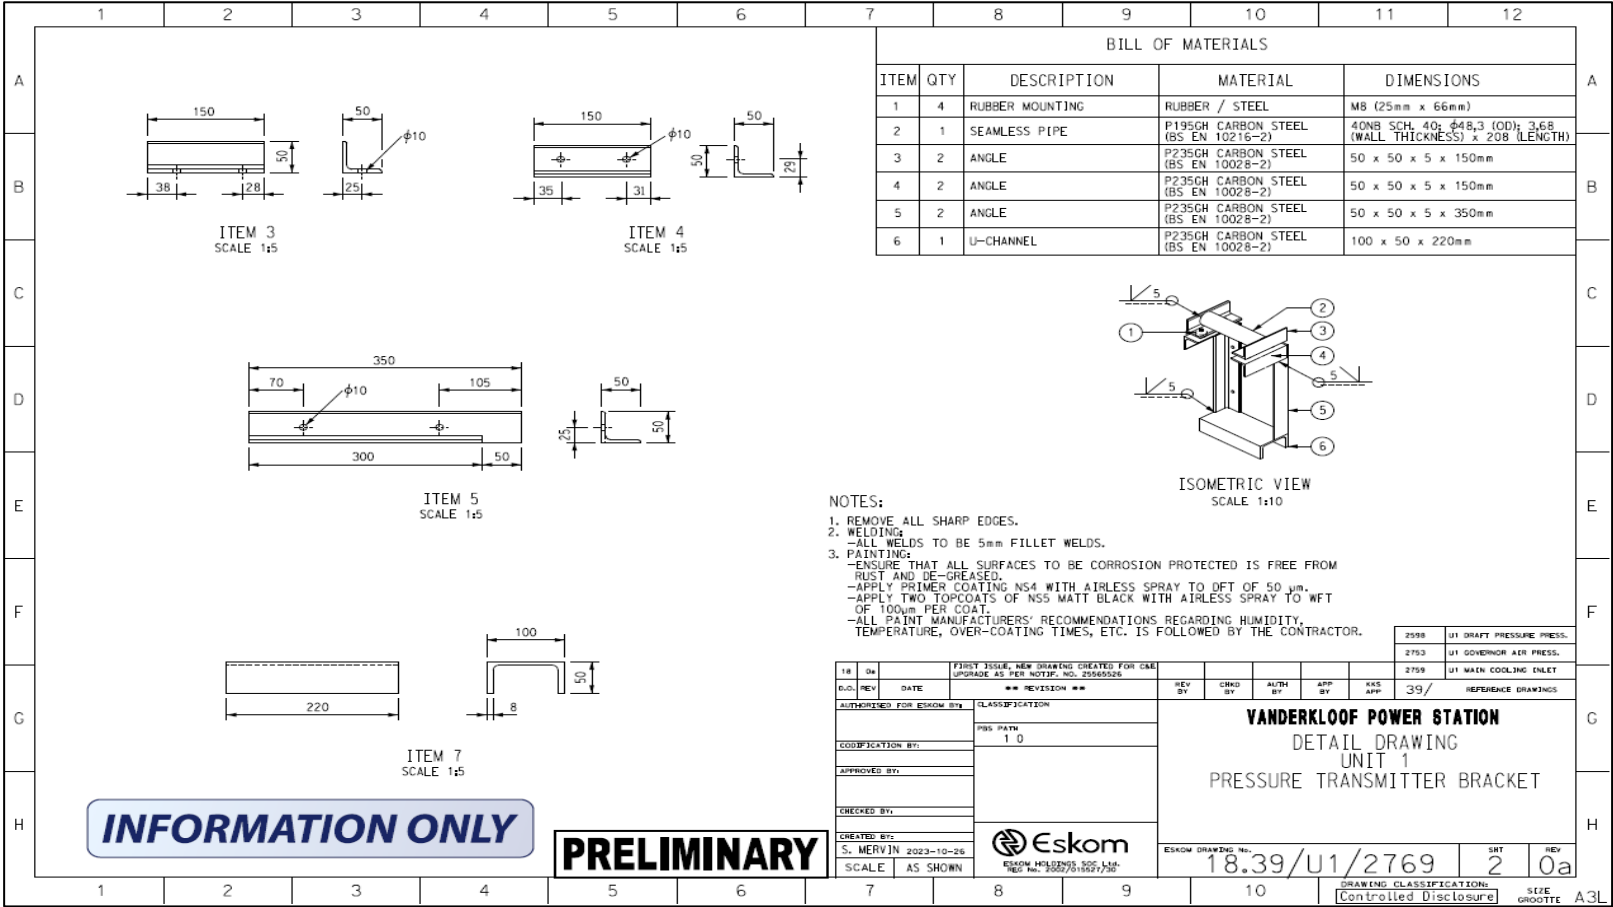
Detail Drawing Single Pressure Transmitter Bracket
